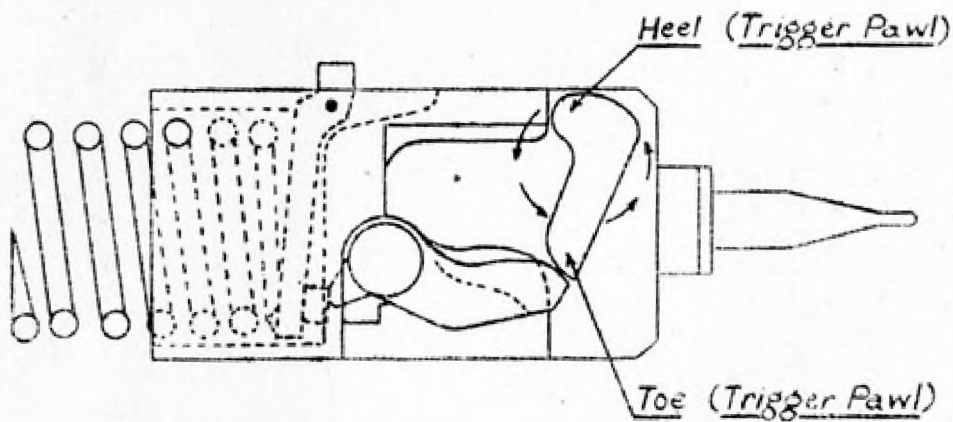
10.5 CM. (4.14 IN.) GUN-HOWITZER (10.5 CM. I.F.H.18).—ACTION OF FIRING MECHANISM
